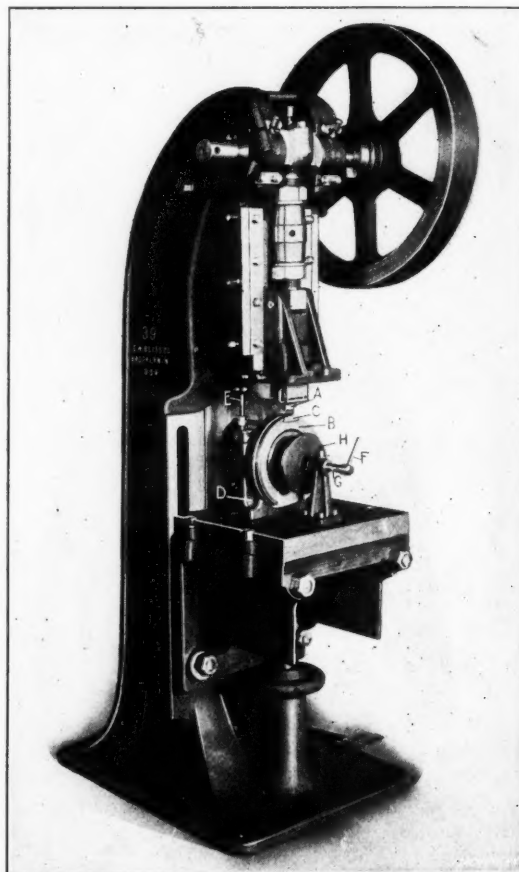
Perforating Attachment with Special Device for Holding Shell in Place
